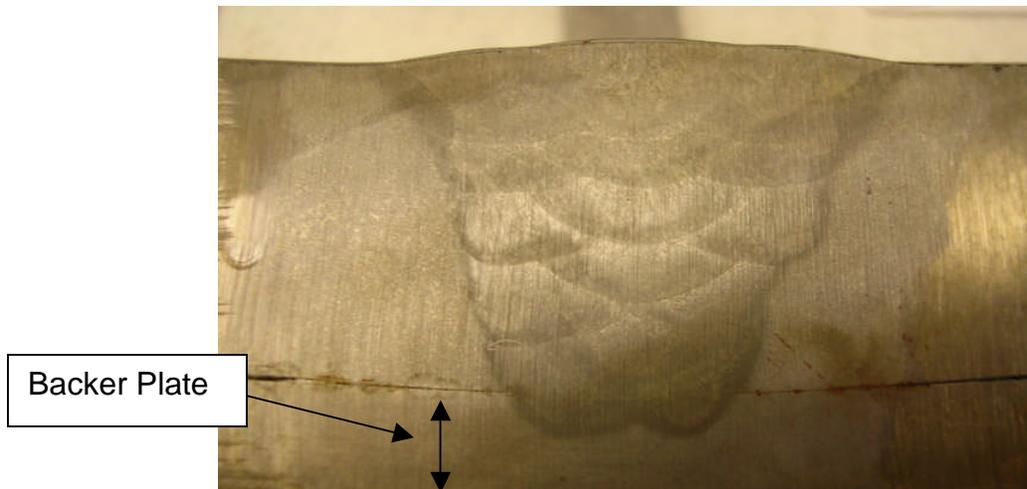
Etched cross-section of a multipass weld in flat 1G position.
